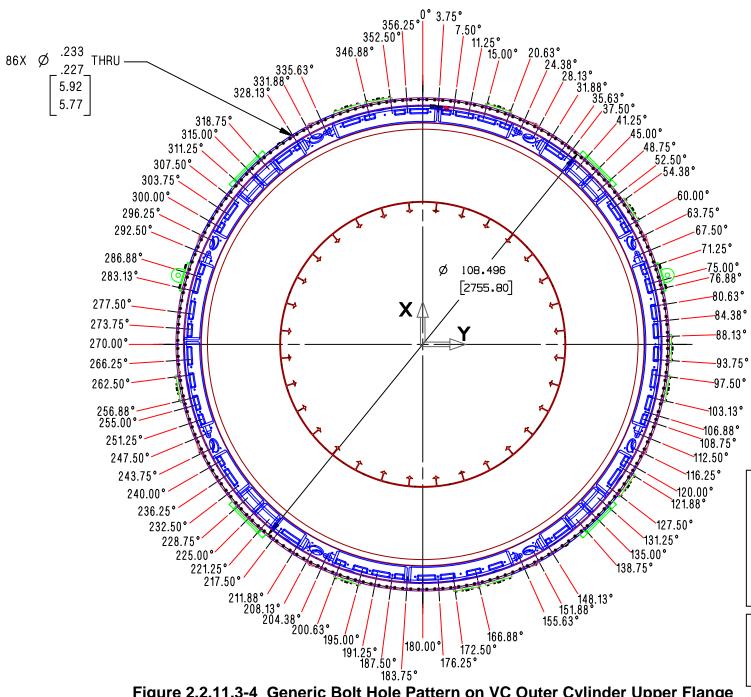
Generic Bolt Hole Pattern on VC Outer Cylinder Upper Flange
